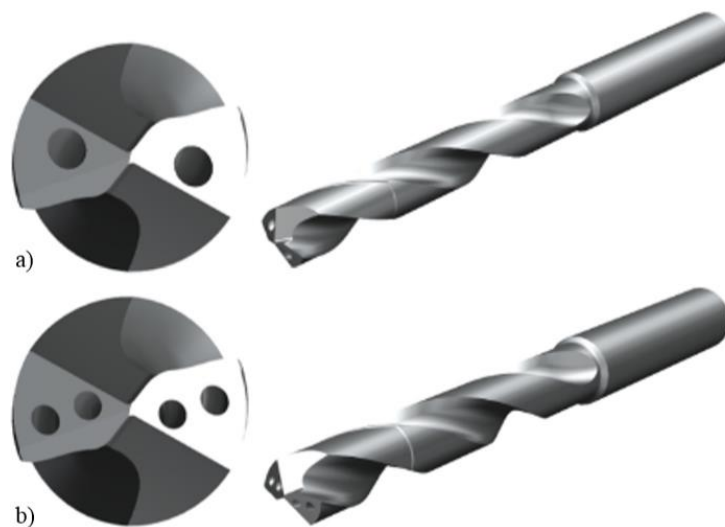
CAD model of a) standard and b) prototype drill.
